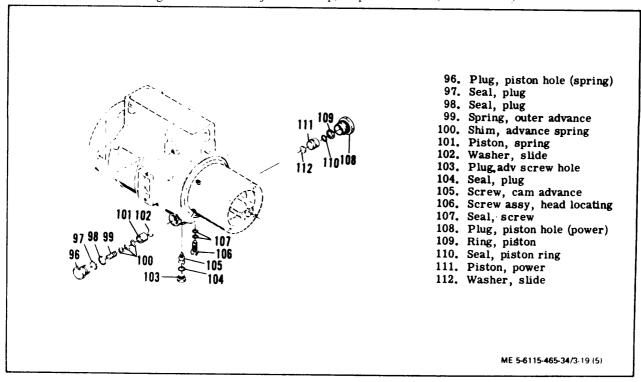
Fuel Injection Pump, Exploded View (Sheet 5 of 7)
